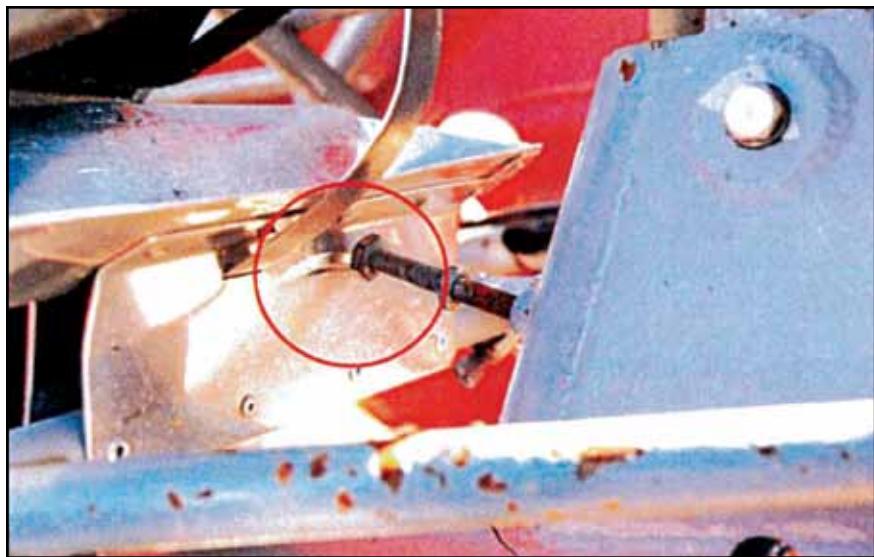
Elevator stop bolt contacting fire extinguisher bracket.
